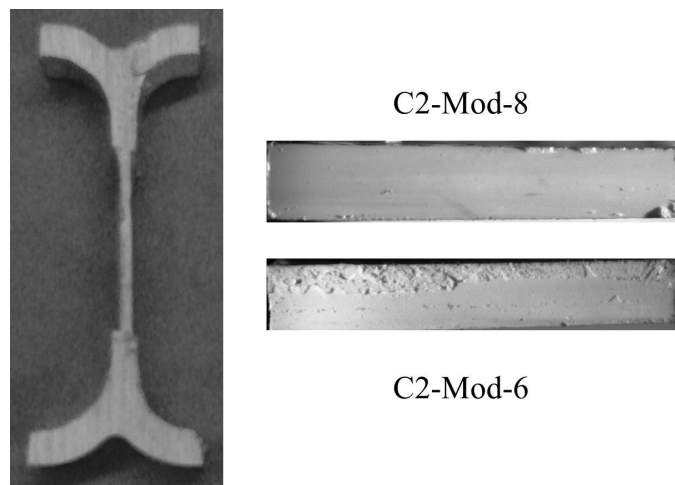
Modified sample used to assess mechanical properties of a smooth knit-line surface and fracture surfaces from two of these.
